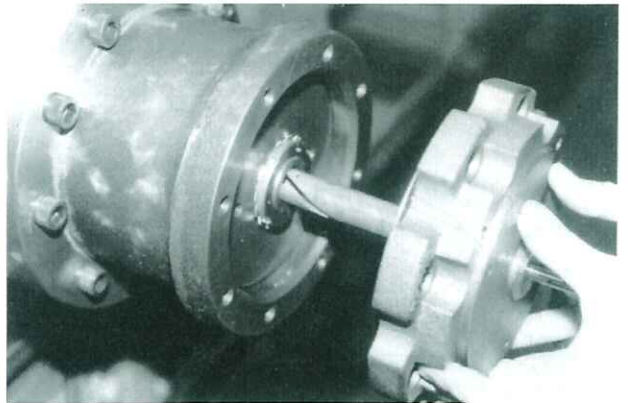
Unloader Cover and Indicator Cylinder Cam
